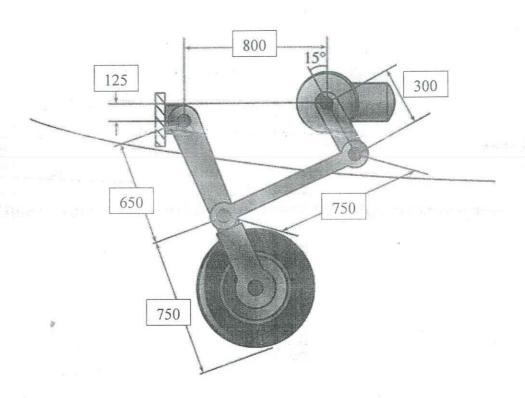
(c): Nosewheel assembly design for a small aircraft (all dimensions are in mm)
